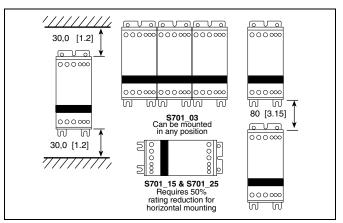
Approx. Dimensions in mm [inches] - Mounting
